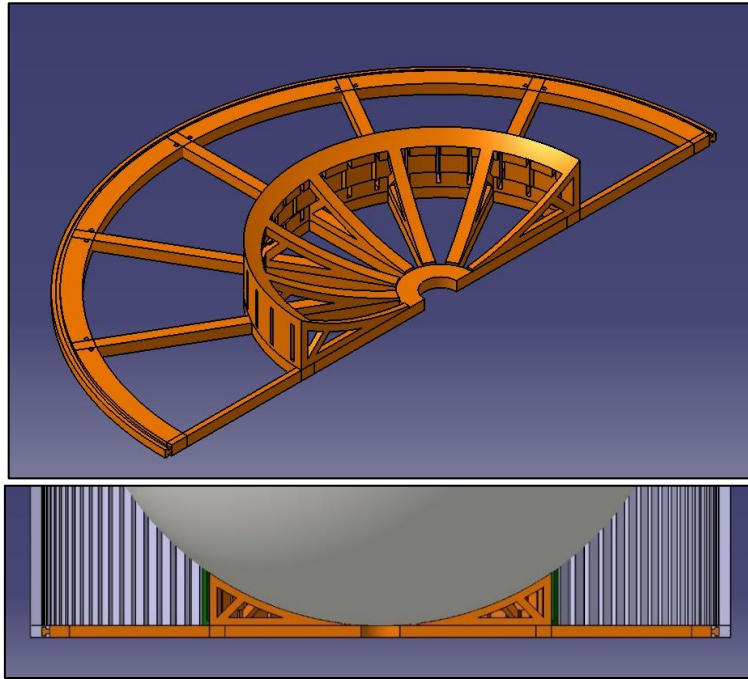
Bottom Ring Fixture (Top) and Bottom Ring Fixture in Payload Bay
